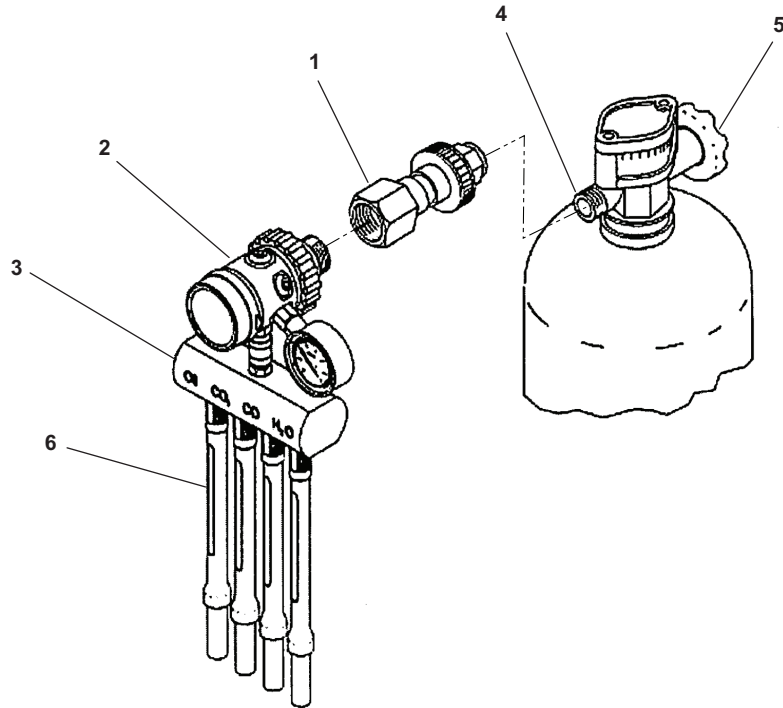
SCBA Cylinder, Adapter, and Measuring Device
